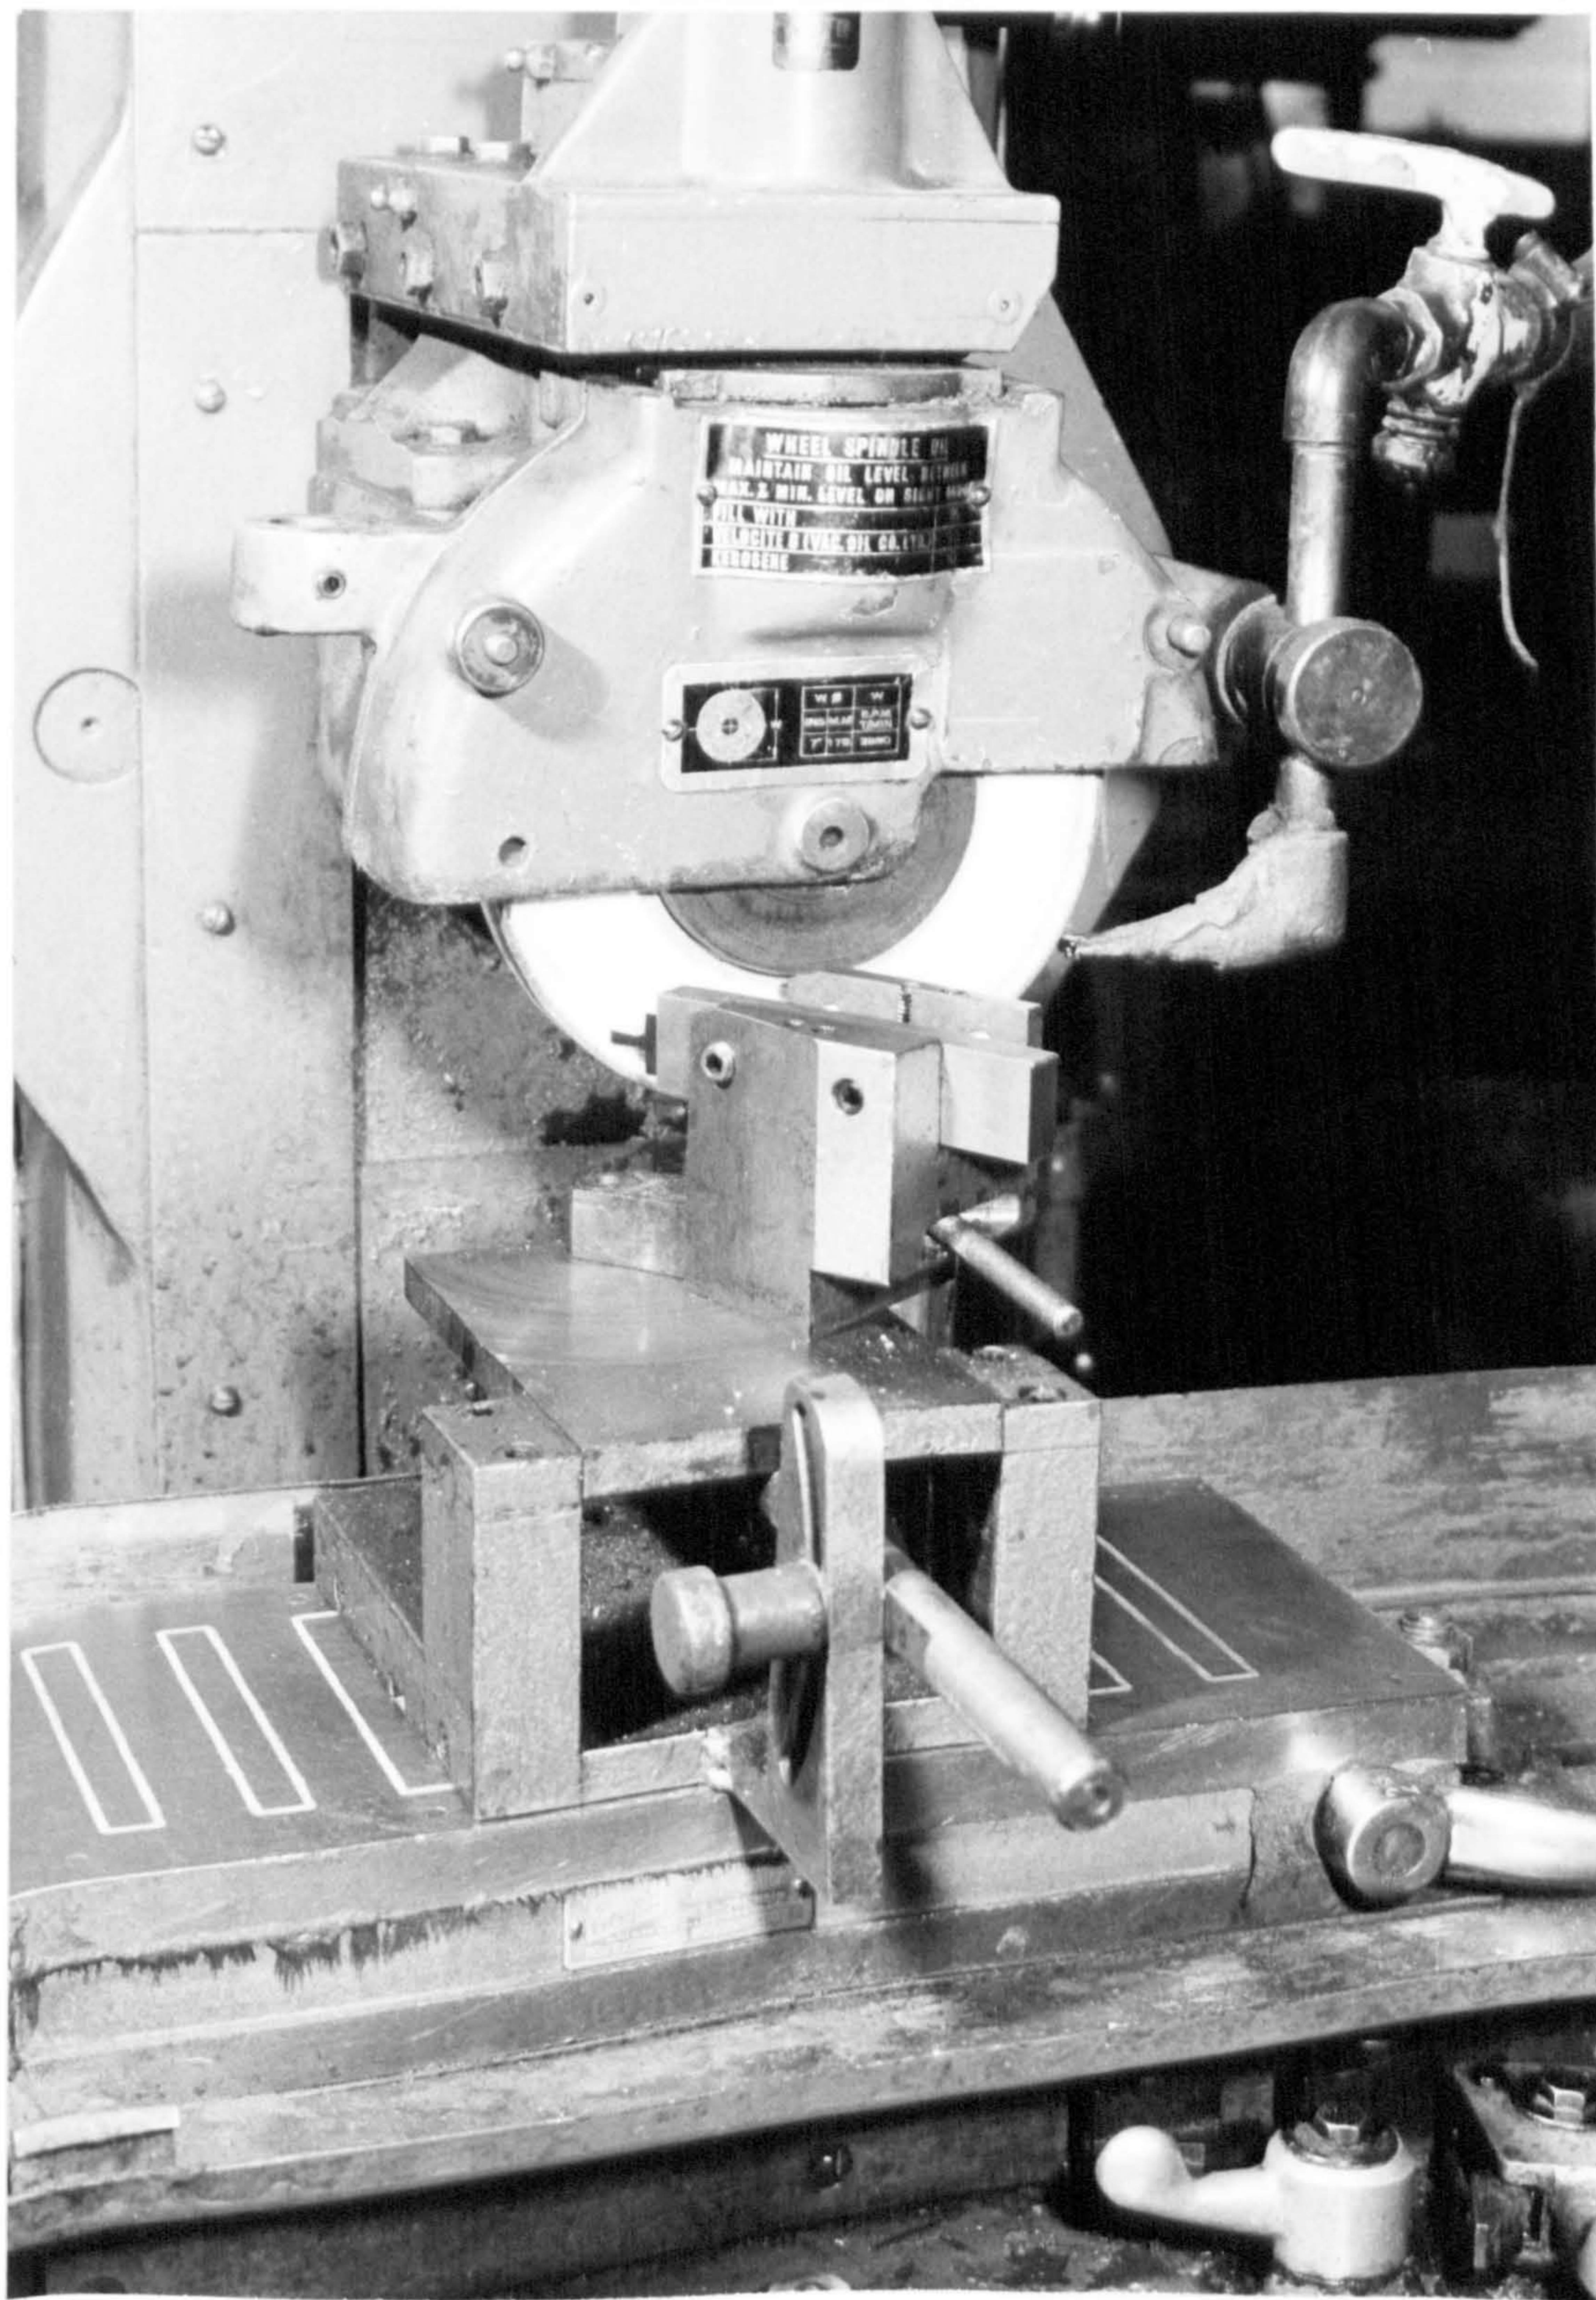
(A) TOOL EDGE RADIUS GRINDING JIG SET-UP ON THE SURFACE GRINDING MACHINE
